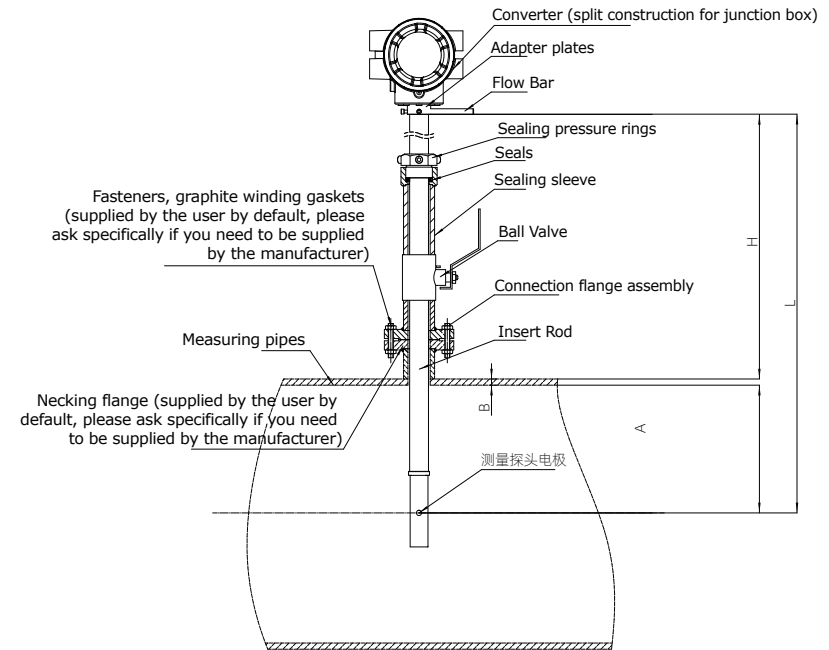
Illustration of the insertion depth of the inline pluggable mounting type sensor
